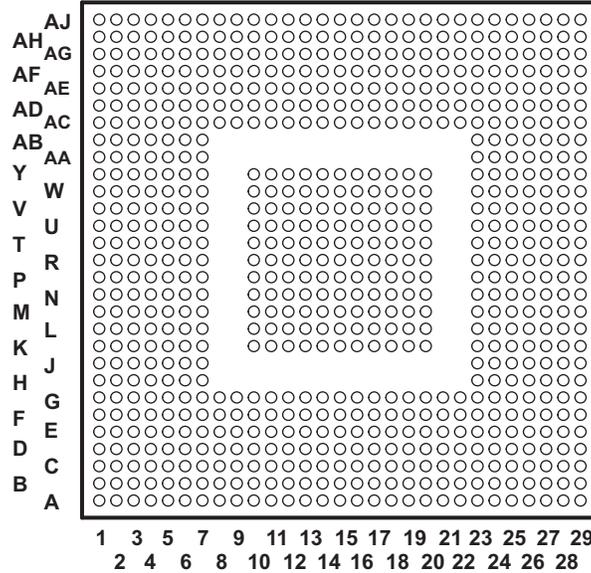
CTZ/ZTZ 737-Pin Ball Grid Array (BGA) Package (Bottom View)
